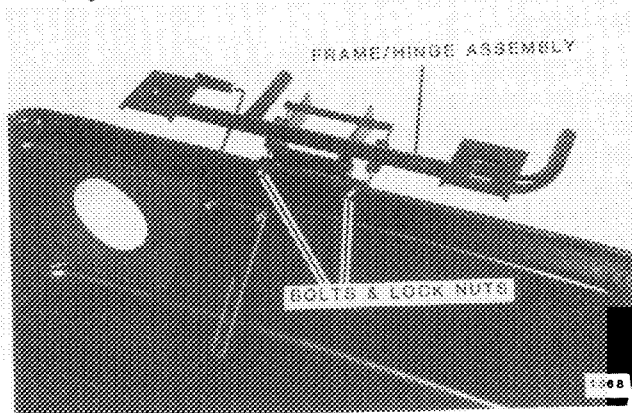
Install Frame/Hinge Assembly to Bagger Top
